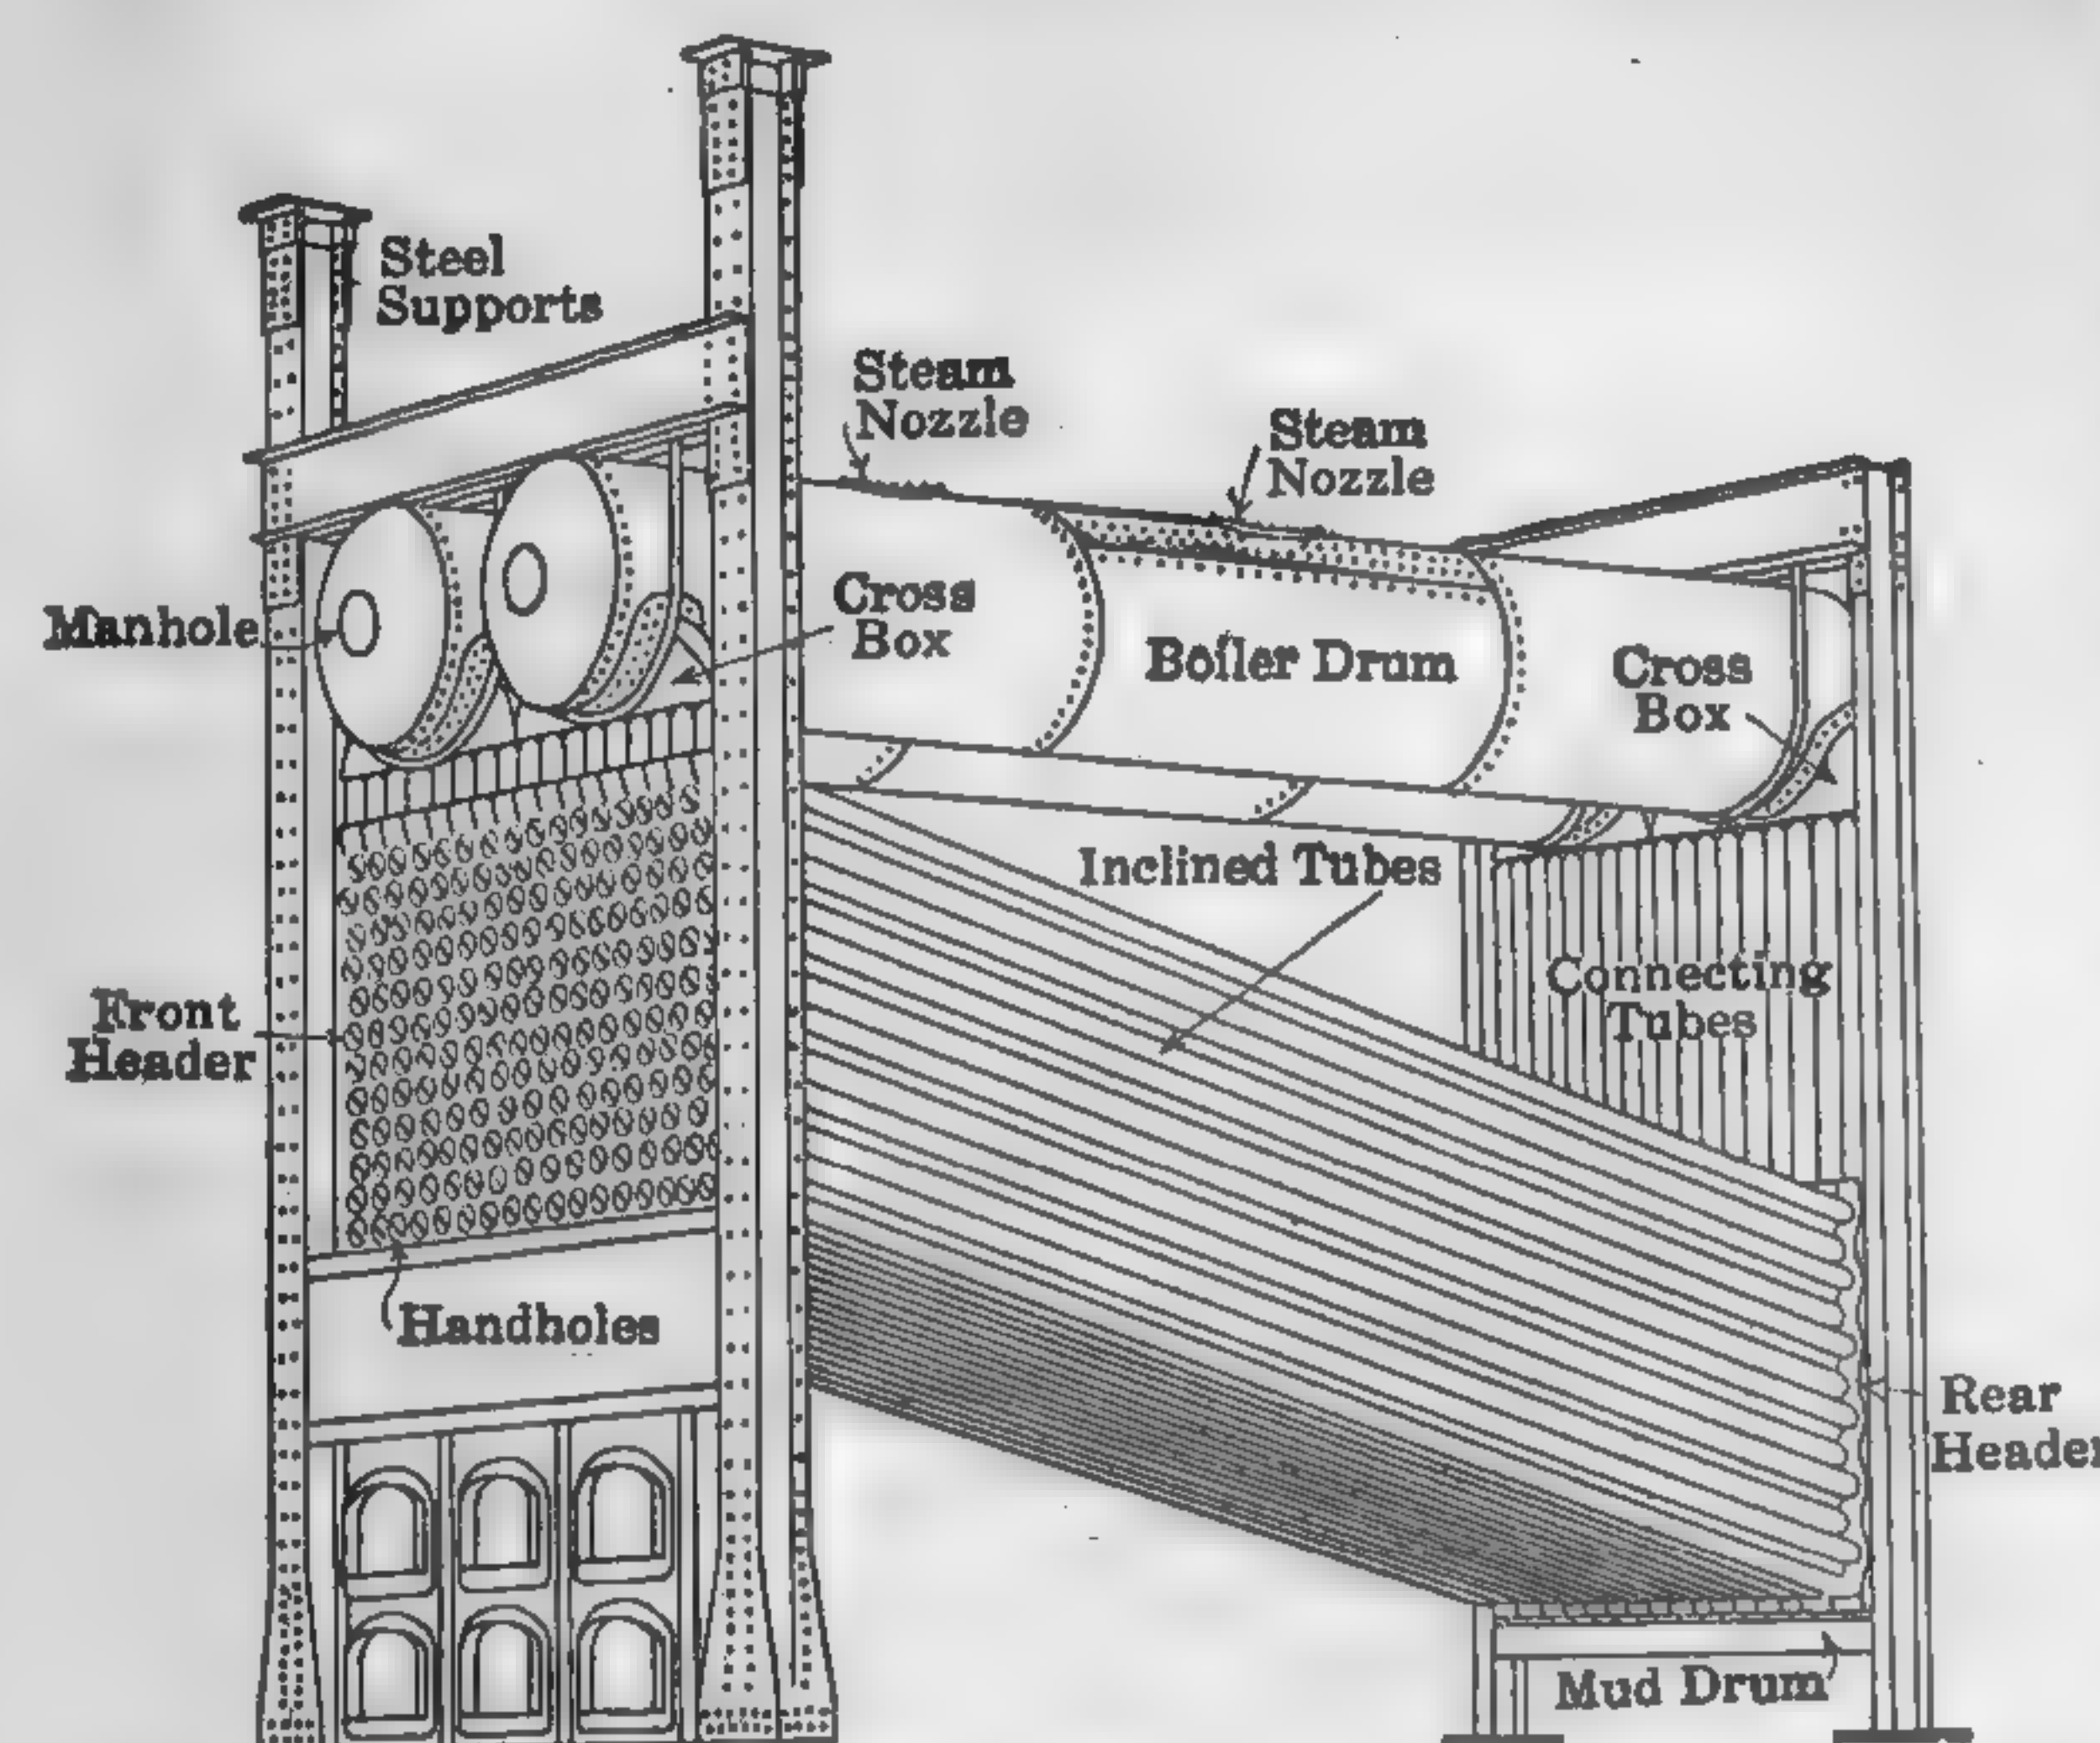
Babcock and Wilcox Boiler Assembly — Longitudinal Drum Type. (Vertical Header.)
